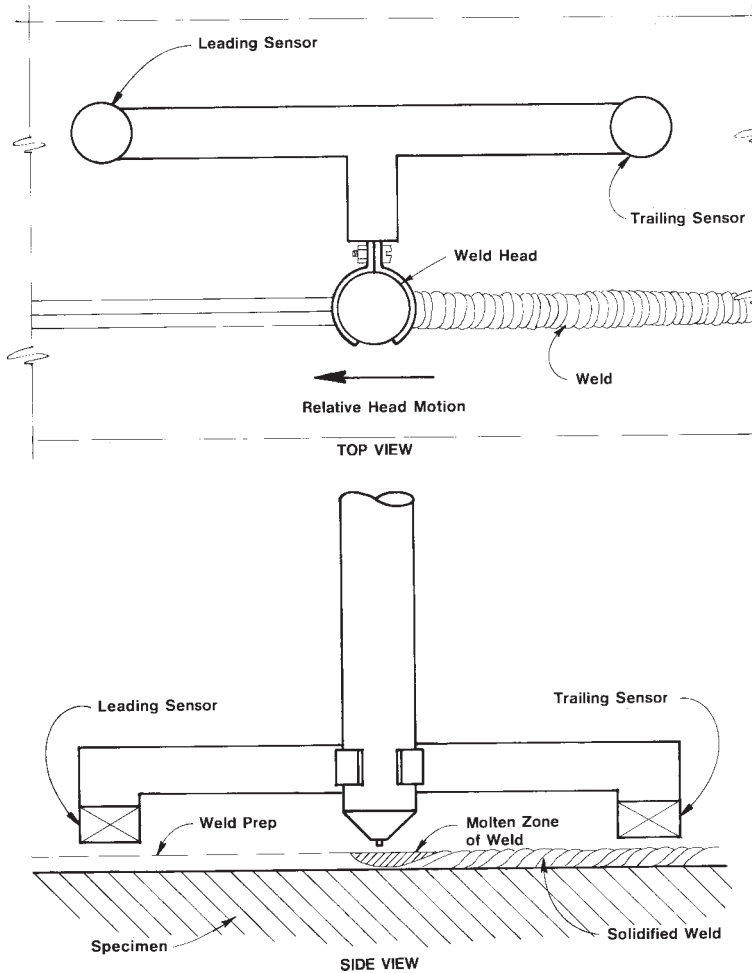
Moving Sensor Configuration with Sensor Position Fixed Relative to Weld Head
